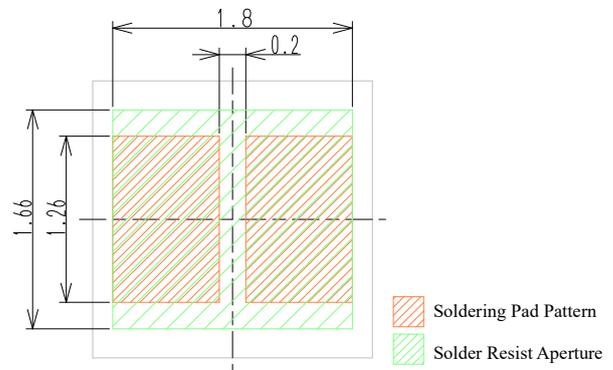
NVSxE21A Recommended Soldering Pad Pattern
